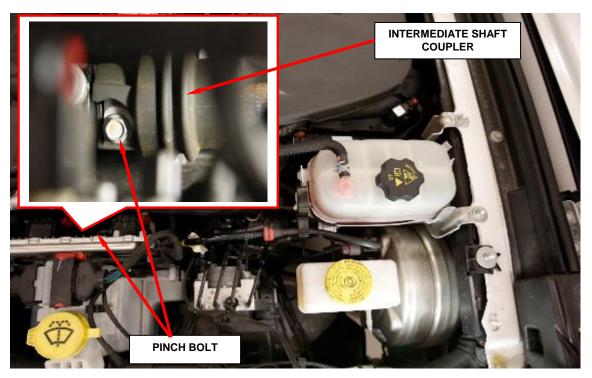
Intermediate Shaft to Steering Gear Pinch Bolt Location
